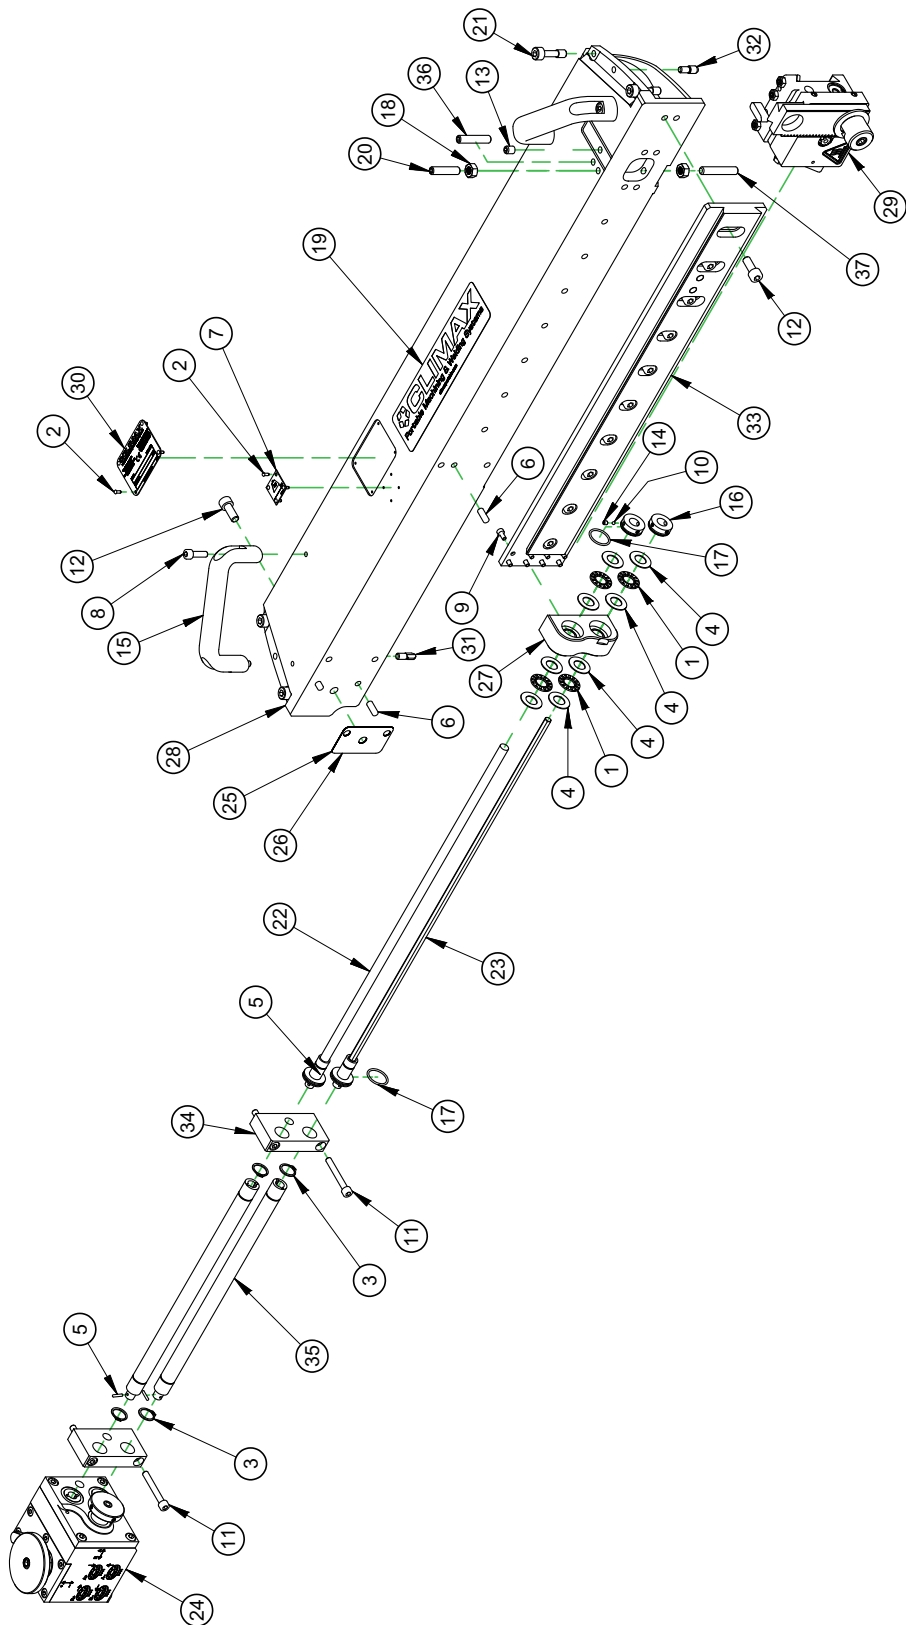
FF3600 RADIAL AND AXIAL SLIDE ASSEMBLY (P/N 80702)
